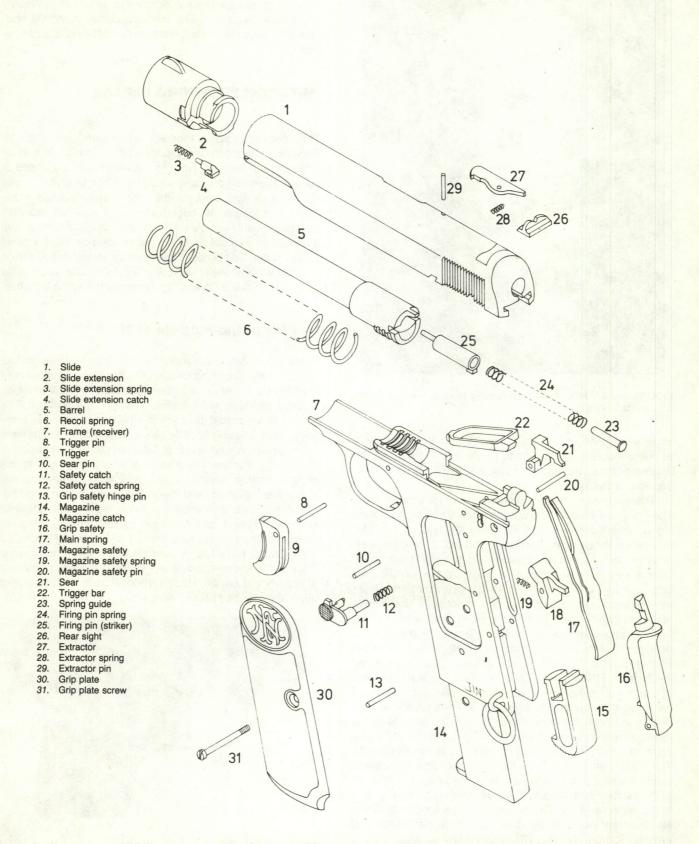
An exploded view of the FN Browning Modele 1910/22. (Jimbo)
